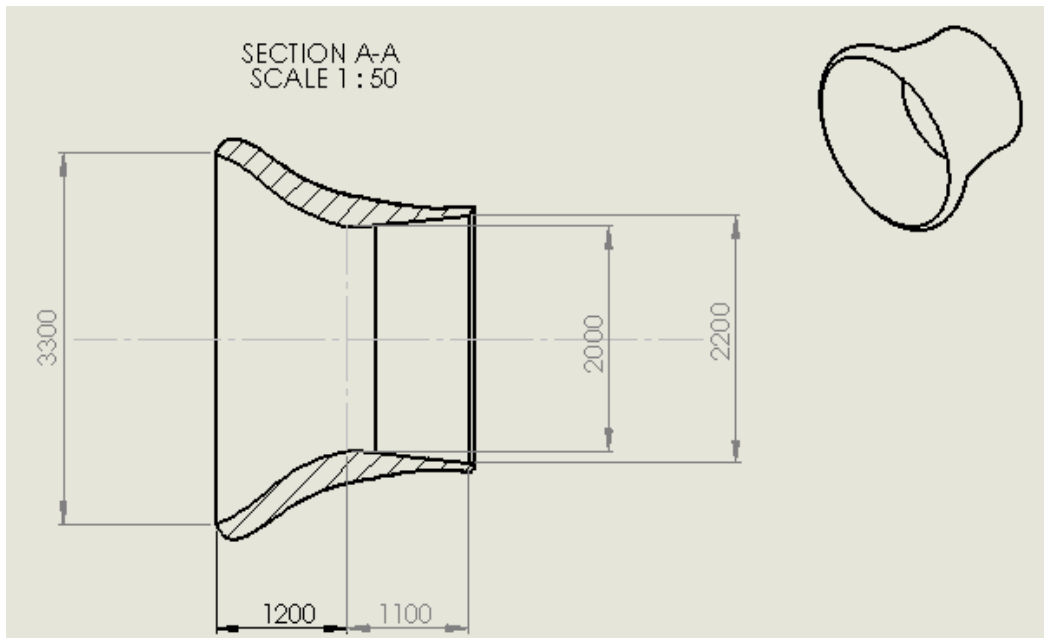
Section view of the inner turbine ducting, all dimensions in mm
